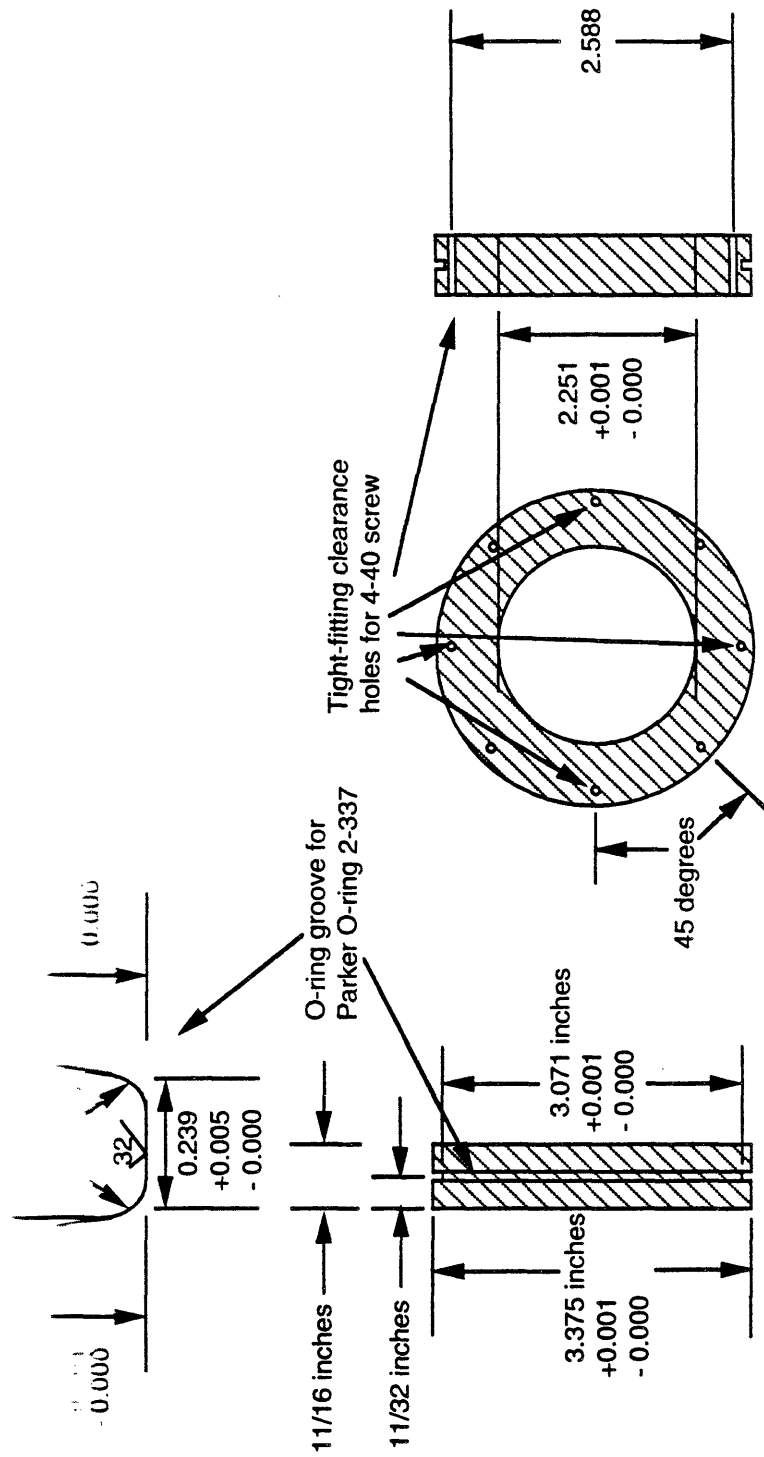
Teflon Ring for Stainless Steel Pipe Flanges
